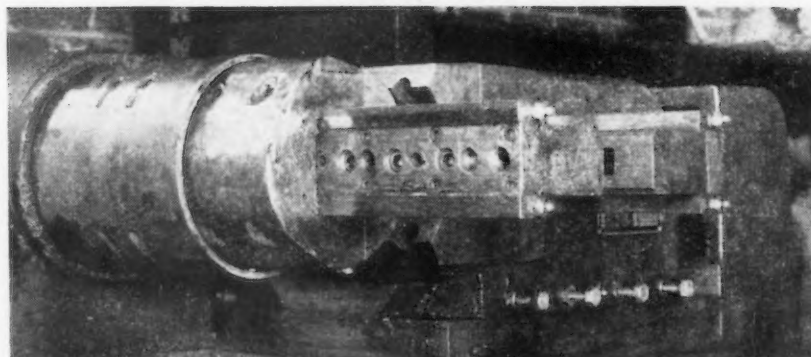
Special machine for removing the flash from the inside and outside of small cylinders simultaneously.
